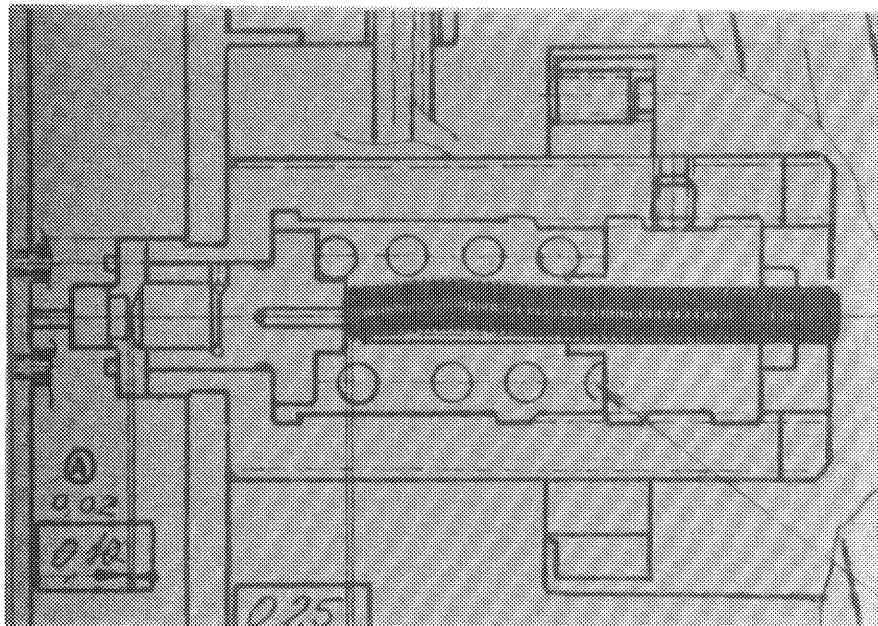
Damaged Pad Supporting Pivot (Sectional View)
